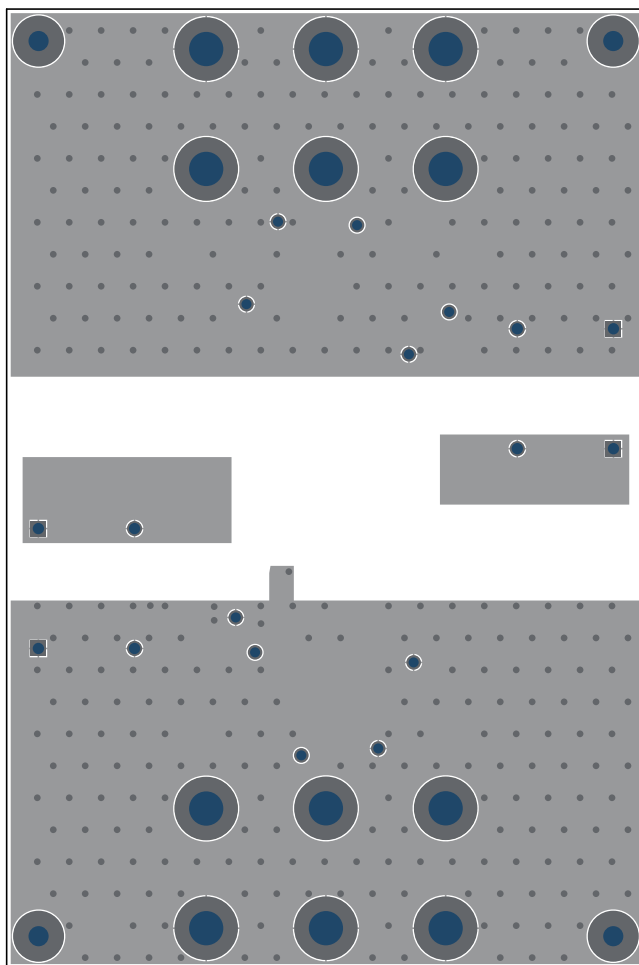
RES60EVM PCB Bottom Layer Mask
